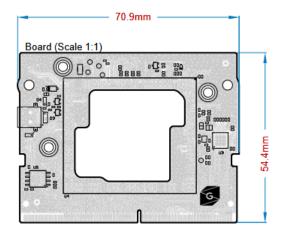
Fabrication Grinn Grinn AstraADA drawing
